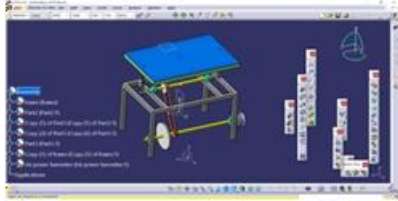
CATIA V5 full assembly view showing component tree: frame, belt drive, flywheel, and Air Power Harvester sub-assembly.
